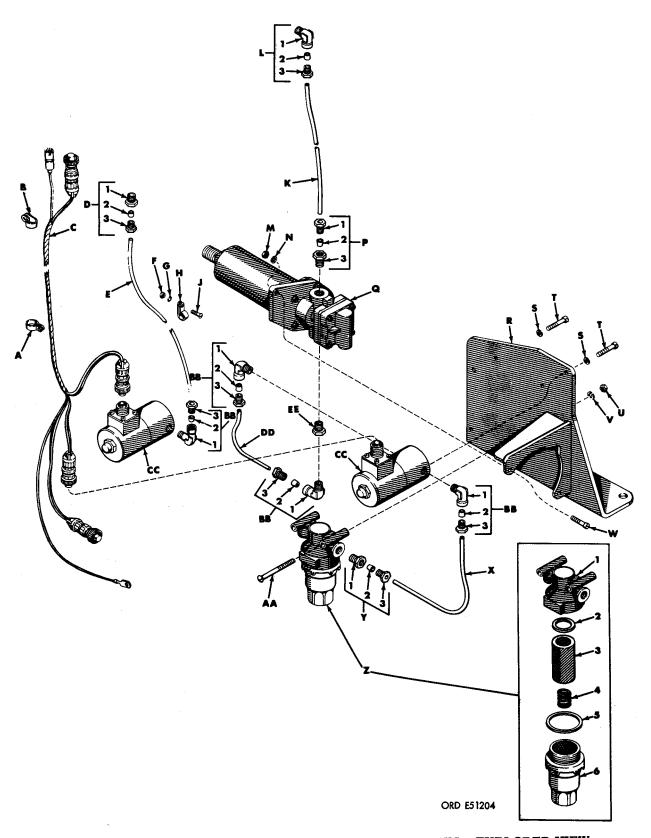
FLAME HEATER FUEL SYSTEM COMPONENTS - EXPLODED VIEW.
